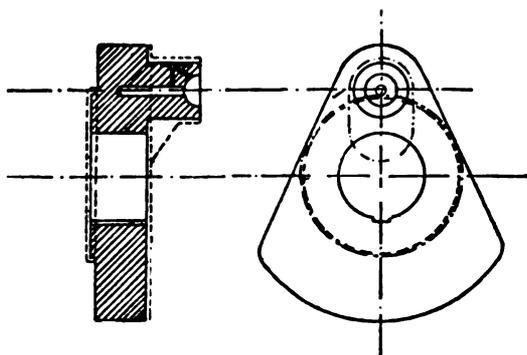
Side Crank. Snow Steam Pump Works.
